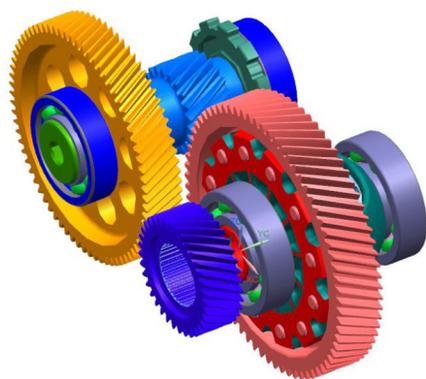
The Chevrolet Bolt EV Drive Unit Gear Set
